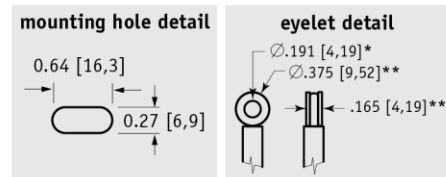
Outline Drawing (36 oz. cable tension only)
